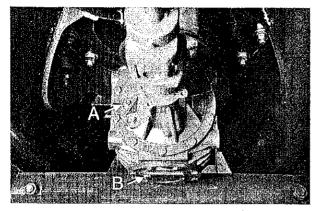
Right-angle Gearbox. A) Fill Plug B) Drain Plug
